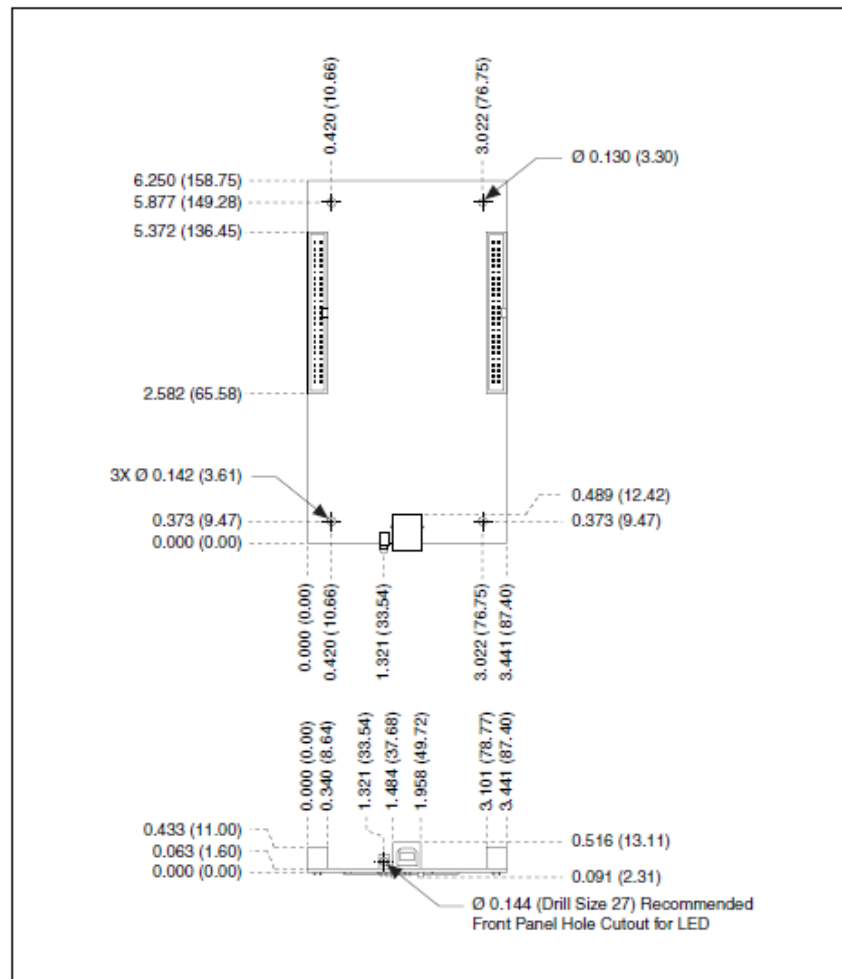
USB-6212/6216/6218 OEM Dimensions in Inches (Millimeters)
